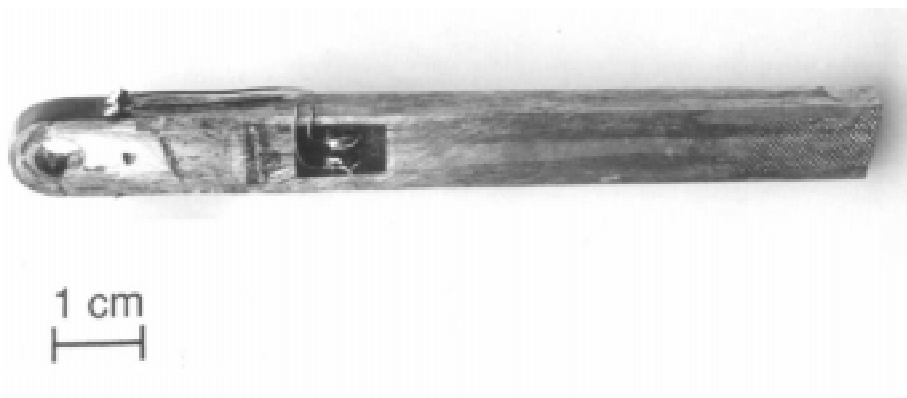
Small specimen geometry equipped with strain gauges after tensile test.
